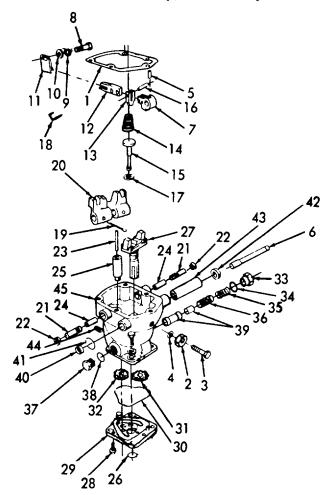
Governor Housing and Base, Disassembly/Reassembly.
